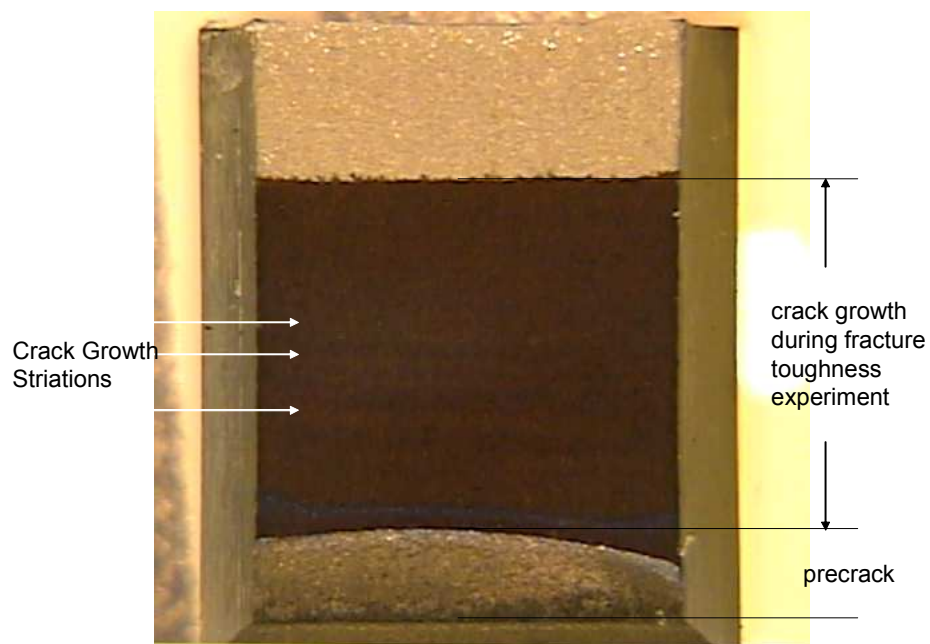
One half of the fracture toughness specimen fracture surface tested at 650°C showing the precrack, crack growth during the fracture toughness experiment, and striations due to crack “pop-in”.
